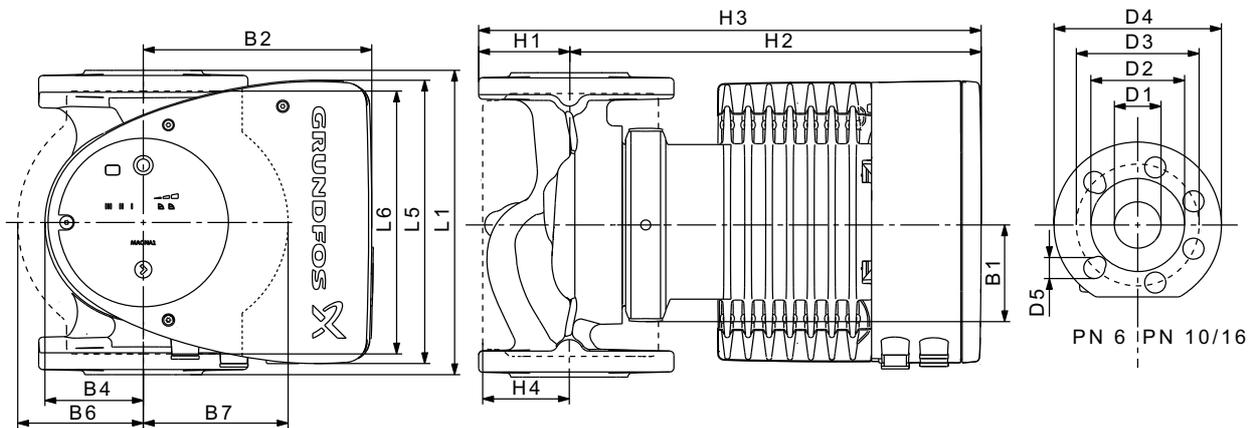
Single-head pump dimensions, terminal-connected versions, flanged version
